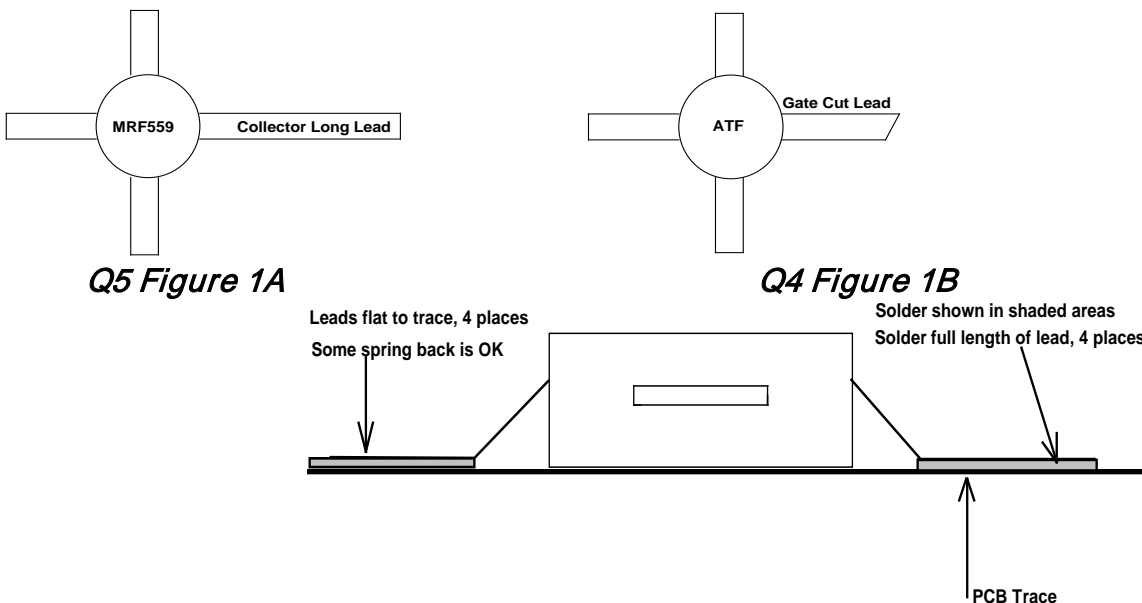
Typical side view of four leaded surface mounted device, lead bending close to body
